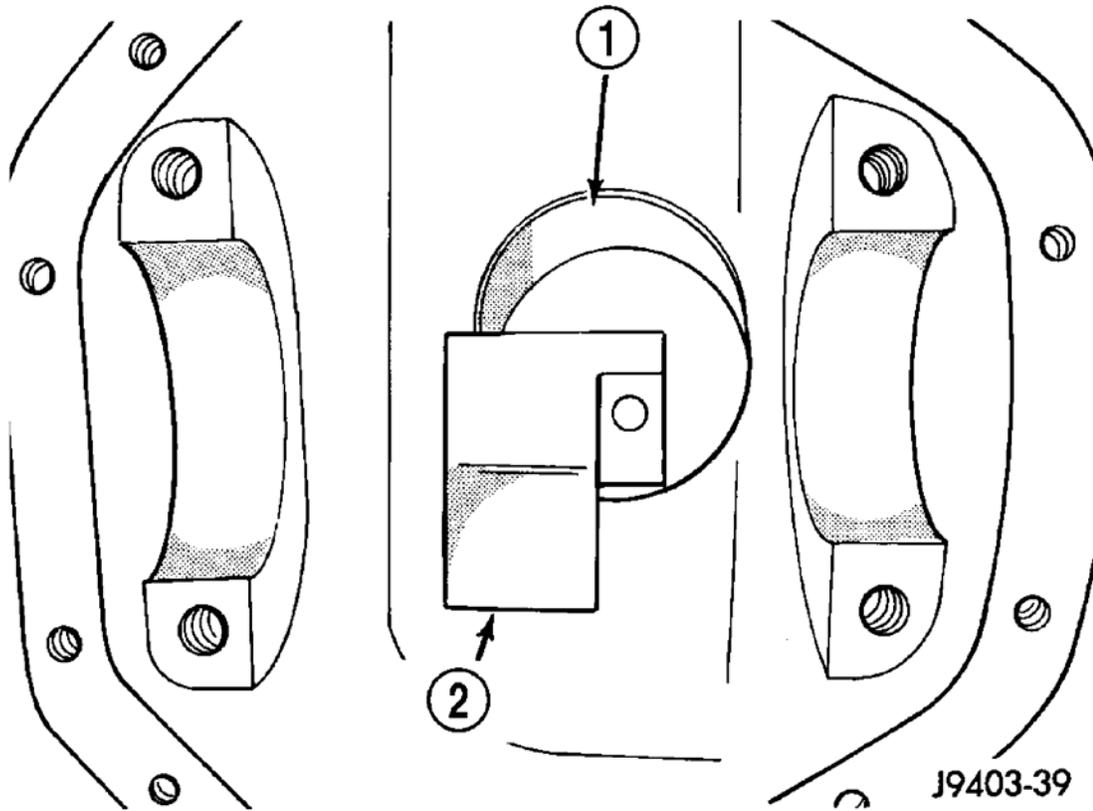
Identifying Pinion Block 8540 & Pinion Height Block 6739
